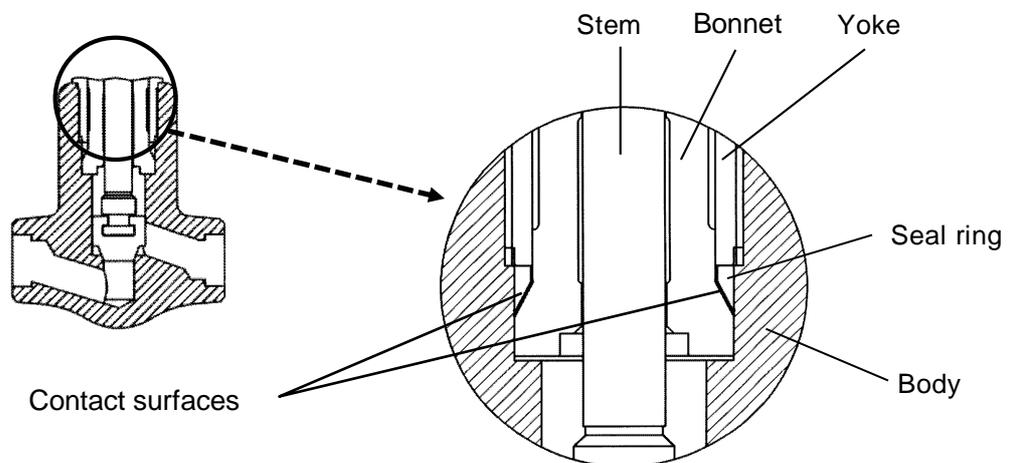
Detail of the Contact Surfaces between the Seal Ring and the Bonnet for Pressure Seal Bonnet Type (Globe Valve)
